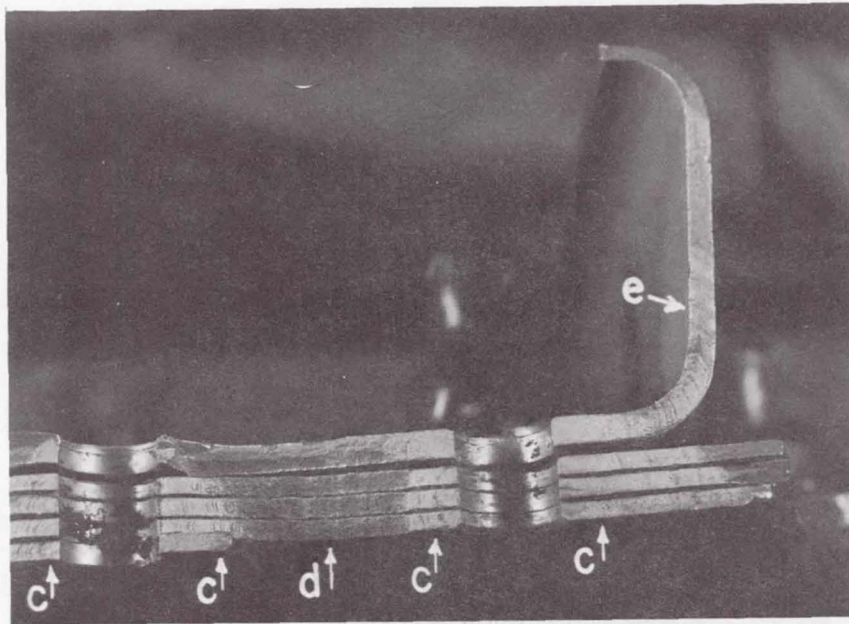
A portion of the fatigue fracture indicated by arrow "a", figure 5. Arrows "c" indicate flat fracture areas; arrows "d" and "e," slant fractures. X 2.
